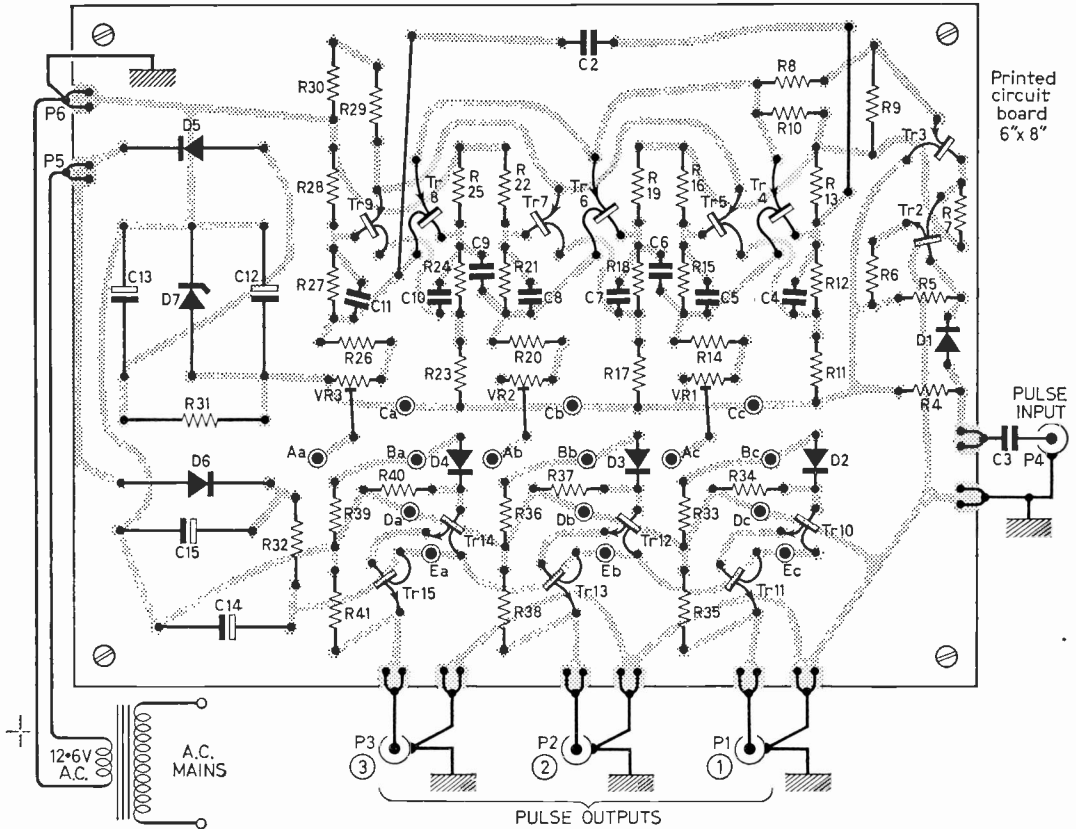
Layout details of the tritch printed board. See also Fig. 4.
